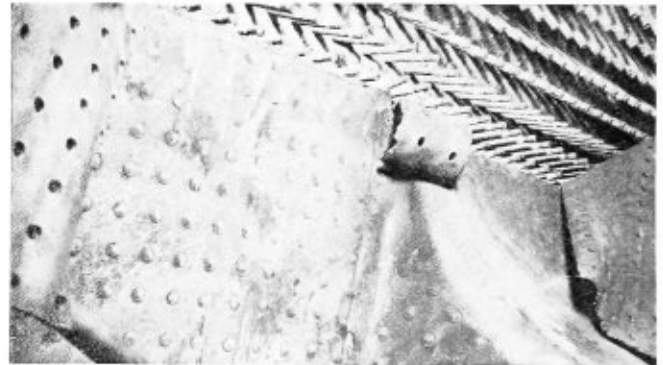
Welded seam between crown and side sheets failed for entire length
